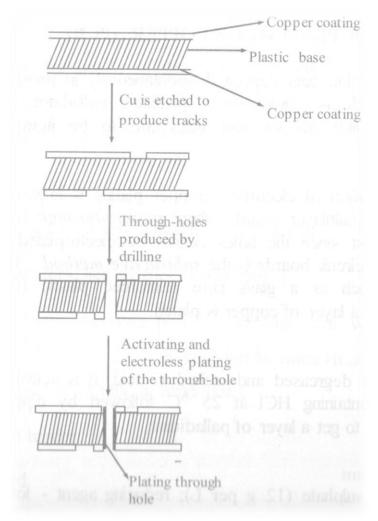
Steps in subtractive technique of plating-through in the manufacture of double sided PCB. Copper cladded tracks on each side of the plastic board are connected through-hole.
